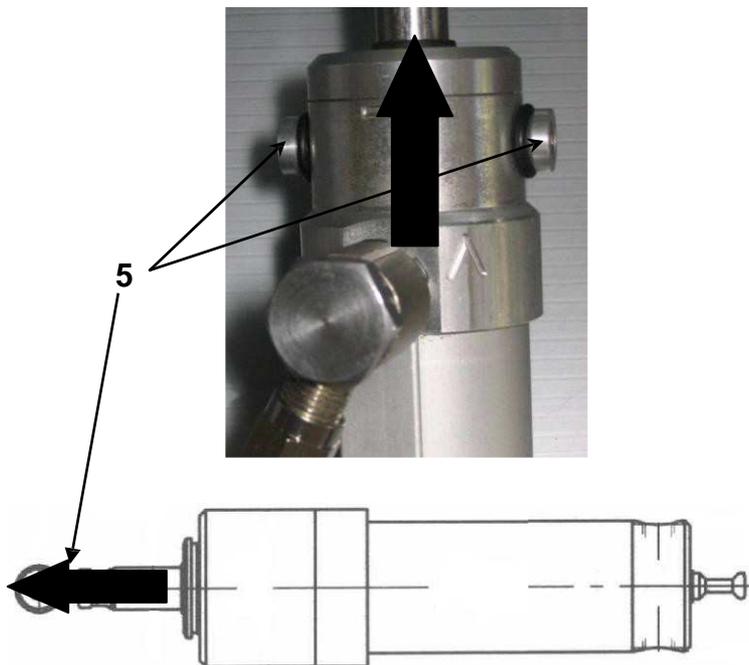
Pneumatic actuator: direction of releasing the lock.
